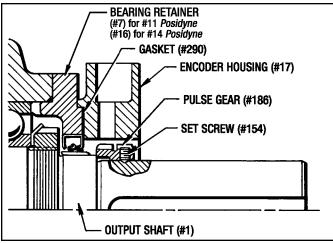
Pulse Gear Alignment (#11 and #14 Posidyne)
